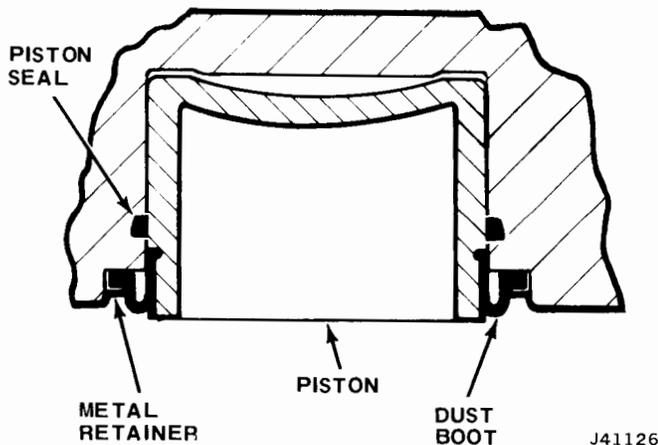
Cross Section of Caliper Cylinder and Piston
